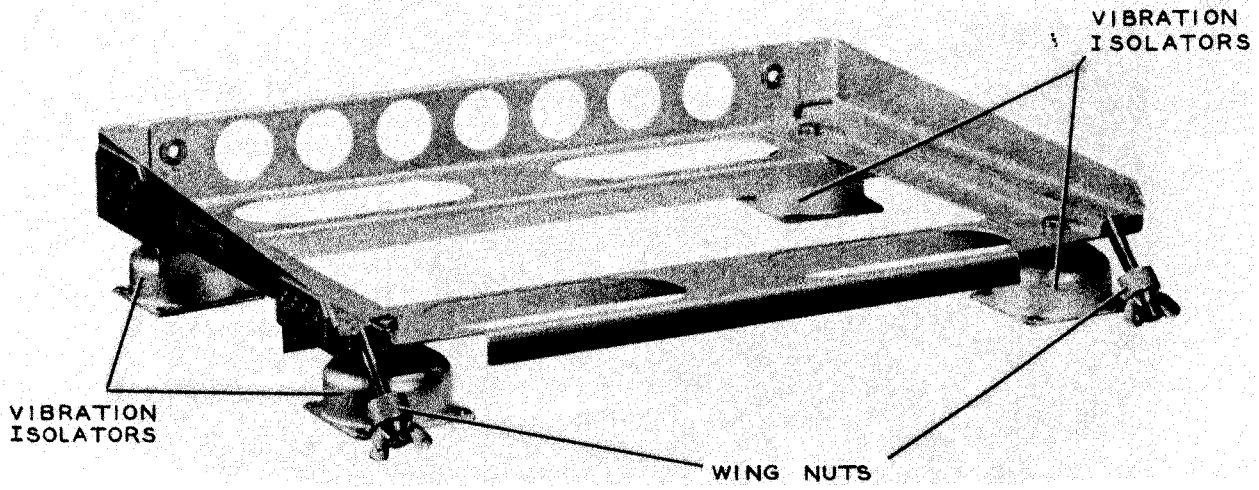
Mounting MT-1518/ARR-41, Top Oblique View
